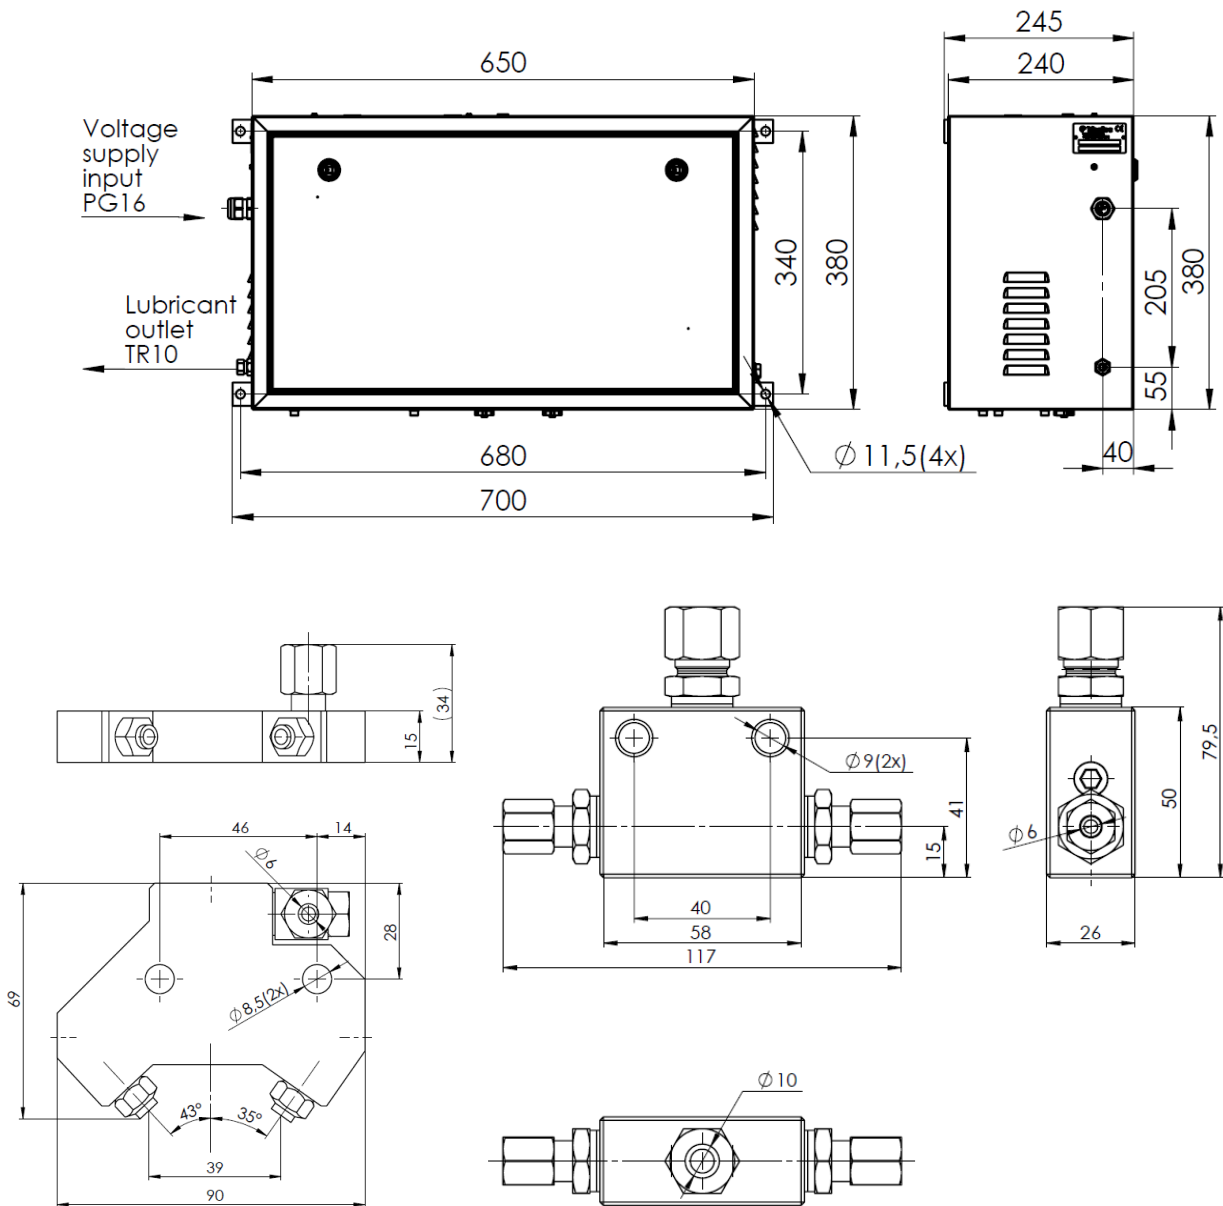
Dimensions drawing of individual lubrication nodes: lubricator box, nozzle, divider
